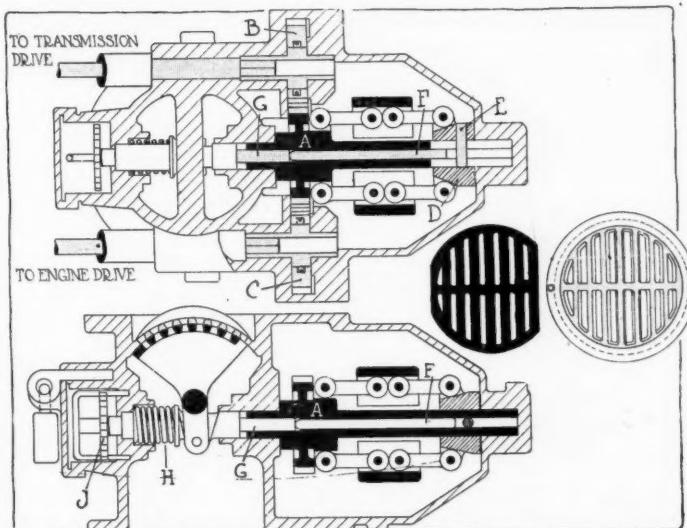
Upper view, horizontal section through governor. Lower view, vertical section through governor. At right, plan view of gridiron valve
